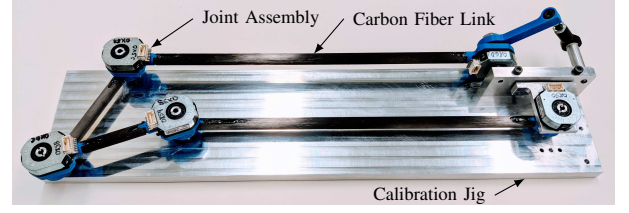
Example of a 5-joint measuring arm prototype mounted on an assembly and calibration jig.
